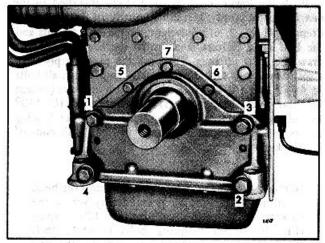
Crankshaft Front Cover Bolt Tightening Sequence
